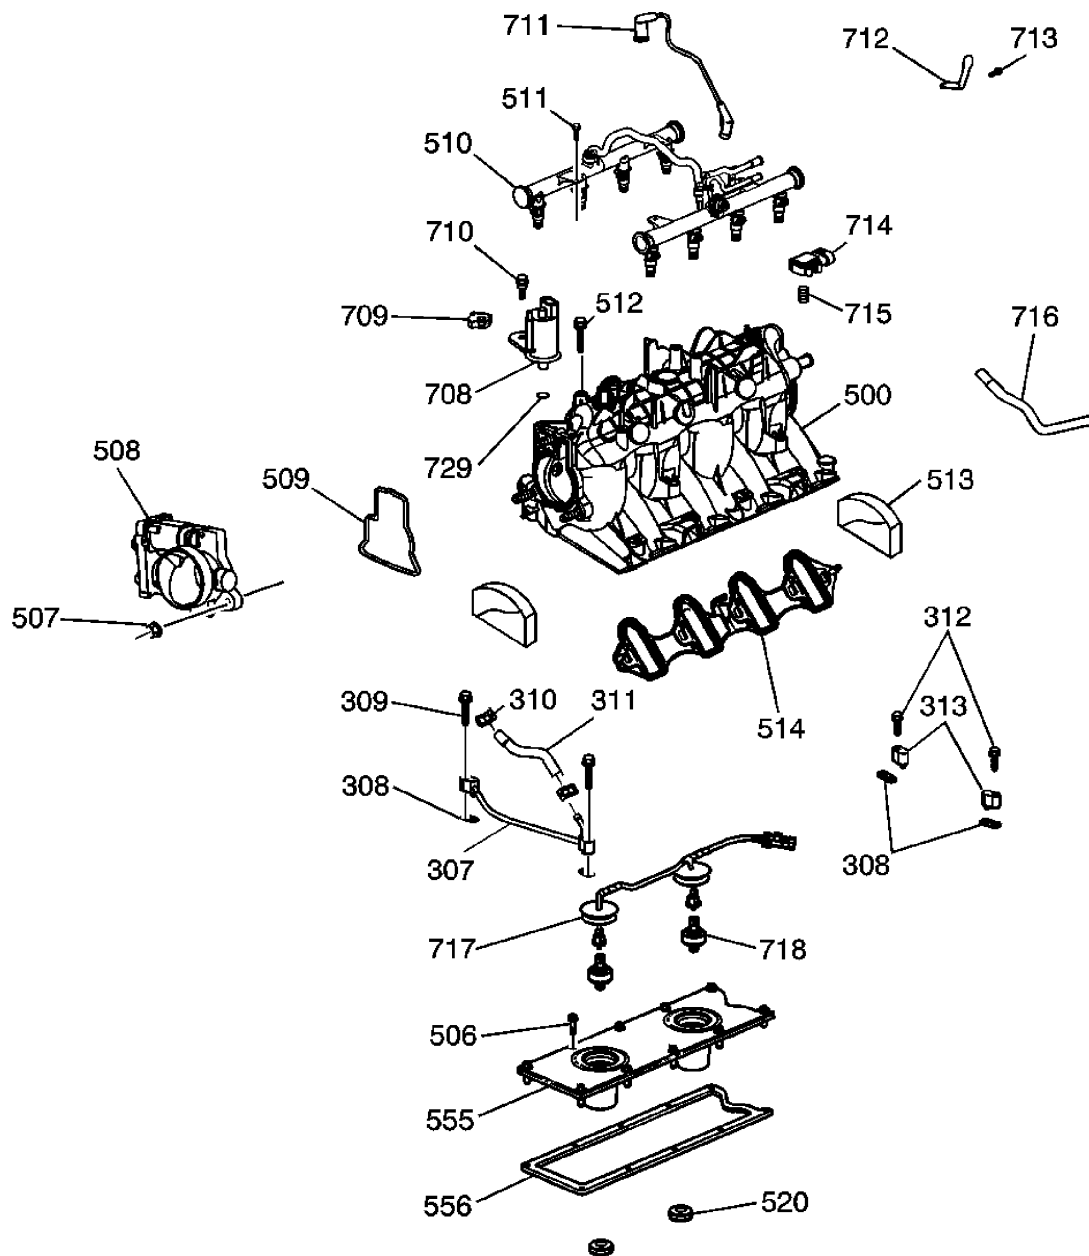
Intake Manifold/Upper Engine Disassembled View
